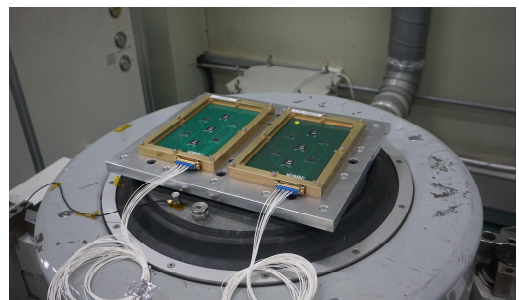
The PCB sample installations on the vibration tester with the aluminum jig
